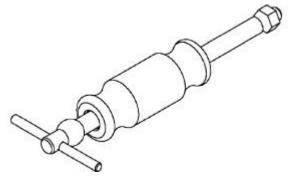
REMOVER - 8517 Courtesy of CHRYSLER LLC
